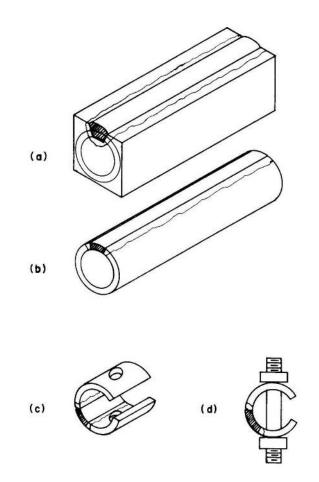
Successive steps for production of base metal HAZ C-Ring specimens. (a) square bar with weld filled groove, (b) tube machined from square bar stock, (c) portion of the tube notched in the heat affected zone with holes drilled through the ring
